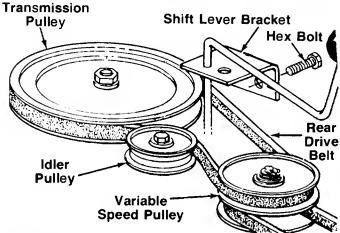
through 28 are shown with the unit tipped up for clarity. It is not necessary to tip the unit to remove the belts.
